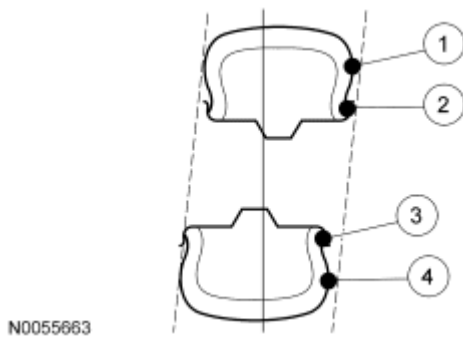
Positioning Runout Gauge To Take Lateral Measurement
